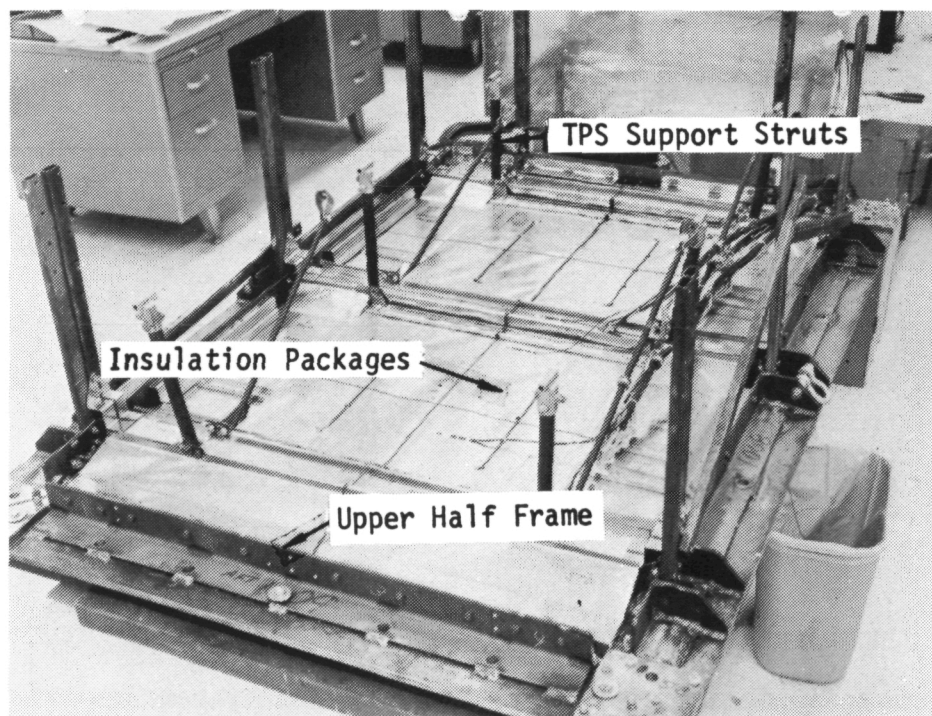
Upper Half of Contractor TPS Test Fixture
